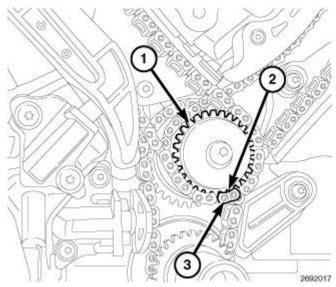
Phaser Timing Marks, Oil Control Valves & RH Camshaft Phaser Lock Courtesy of CHRYSLER GROUP, LLC
